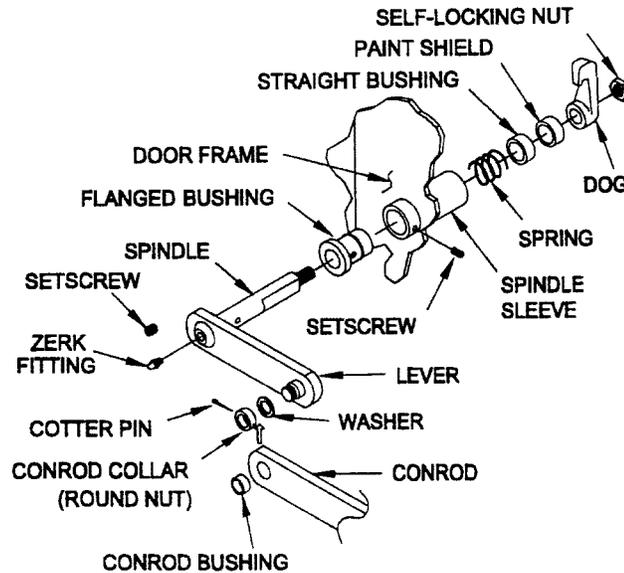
A. Quick-Acting Door Lever Assembly Modified by MACHALT 167-31010 (ECP-526)
